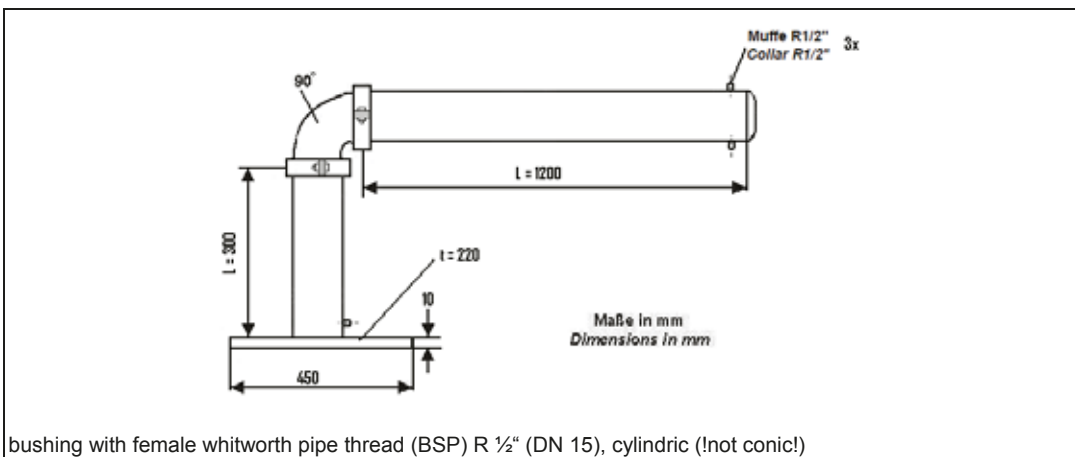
Test sample assembly for pipe fittings – 90° bend
